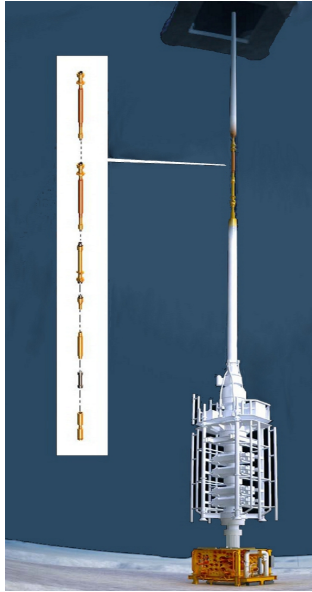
Illustration of a riser system extending from the rig down to a BOP. The exploded drawing next to the pipe shows mechanical connectors welded to the ends of each pipe segment. Modified from a FMC illustration [2].
